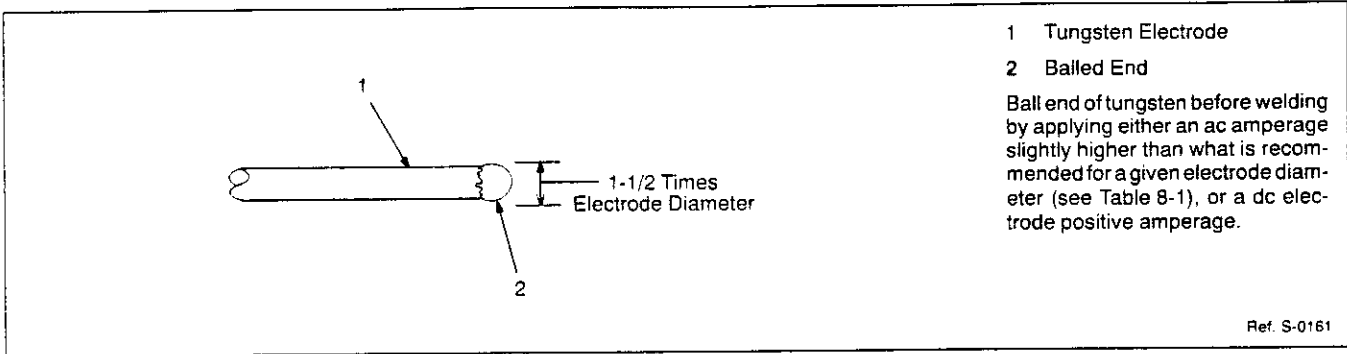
Preparing Tungsten For AC Or DC Electrode Positive (DCEP) Welding
